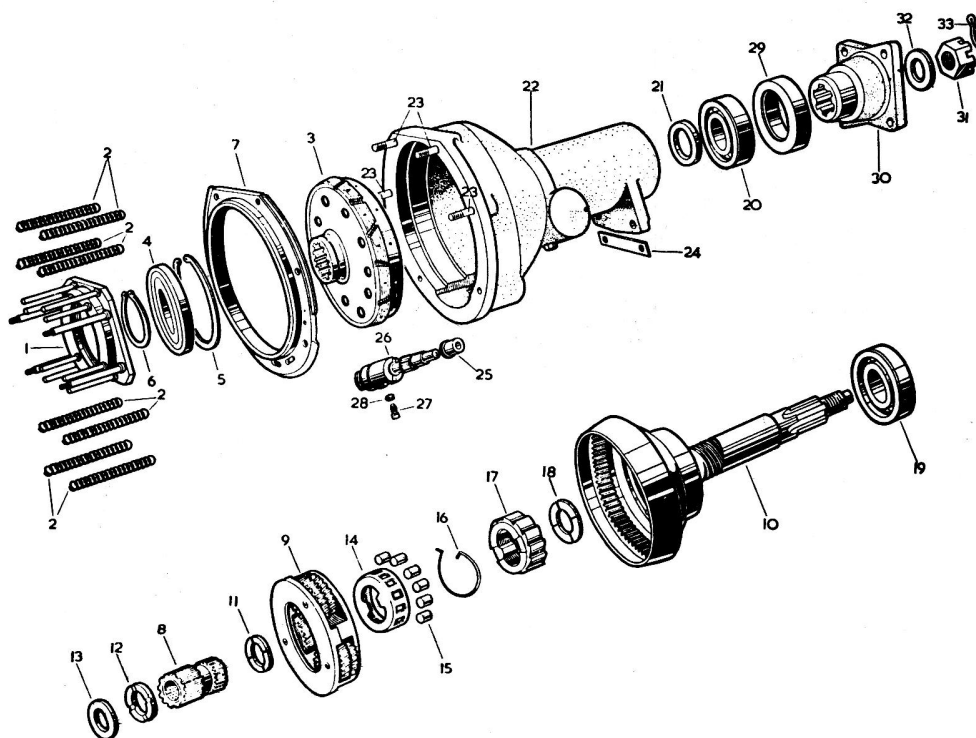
THE REAR CASING ASSEMBLY 'A' TYPE UNIT
